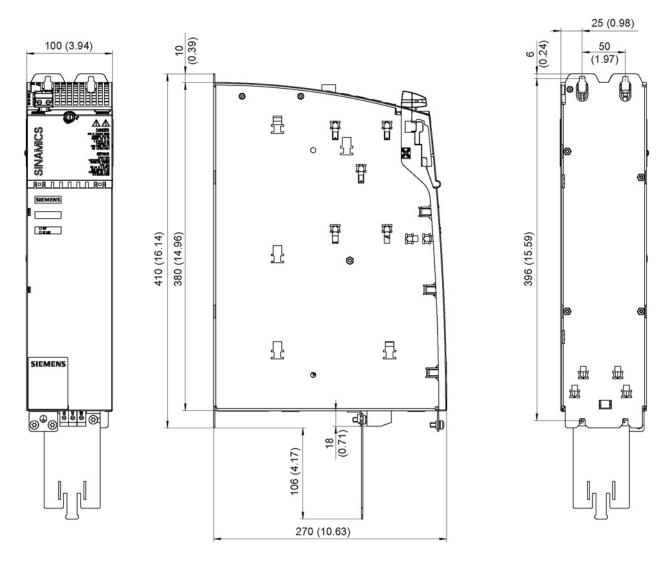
Dimension drawing of 16 kW Smart Line Module with internal air cooling, all dimensions in mm and (inches)
